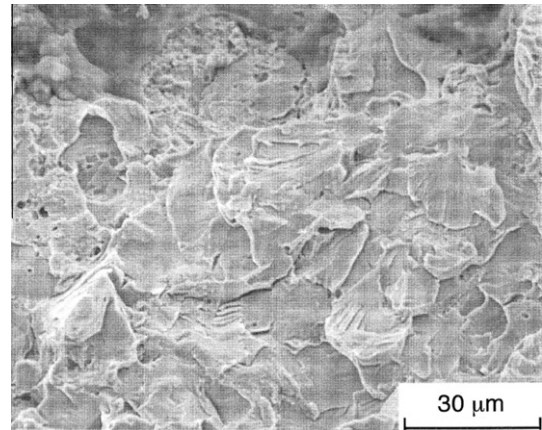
Fracture surface near the crack initiating point after pickling.
